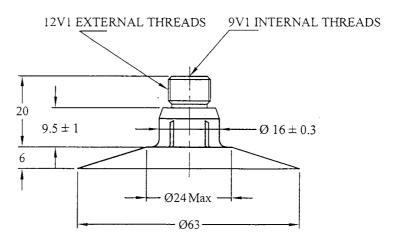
Tractor Valve B 20 5 63 Air Water Filling Type (see Fig. 14 for Assembly)
